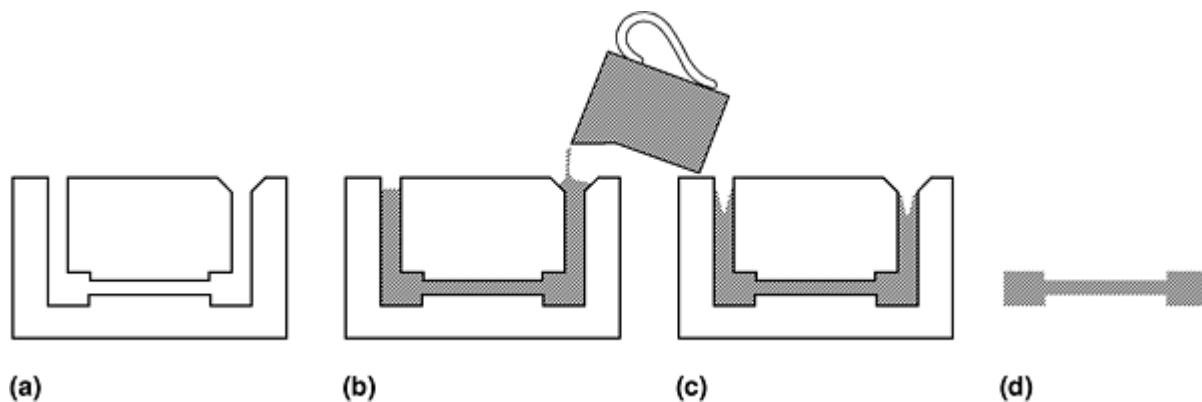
Slip casting of metal powders. (a) Assembled mold (Source: Ref 4). (b) Filling the mold. (c) Absorbing water from the slip. (d) Finished piece, removed from the mold and trimmed
